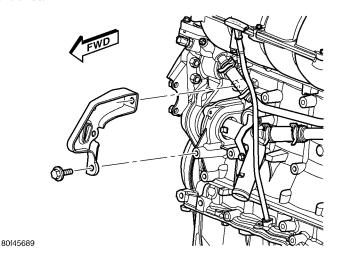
Bracket Mounting To Engine - 2.4L Turbo
